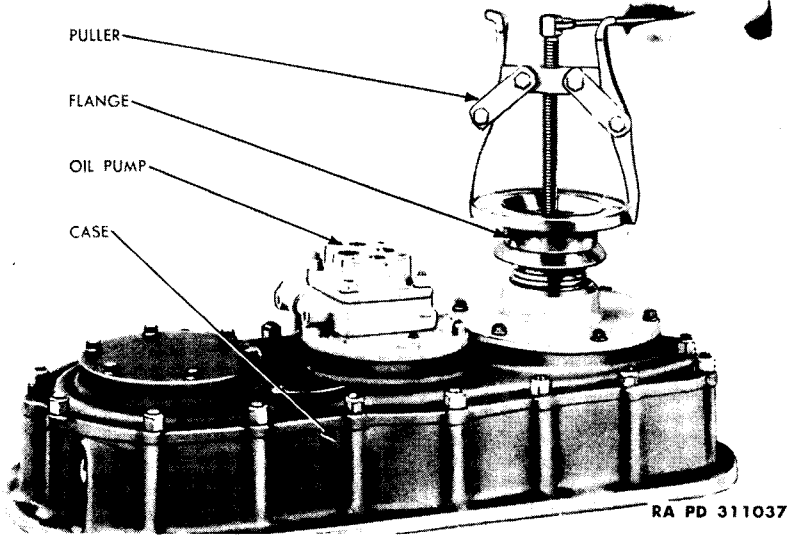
Removing Transfer Case Flange, Using Puller 41-P-2911
